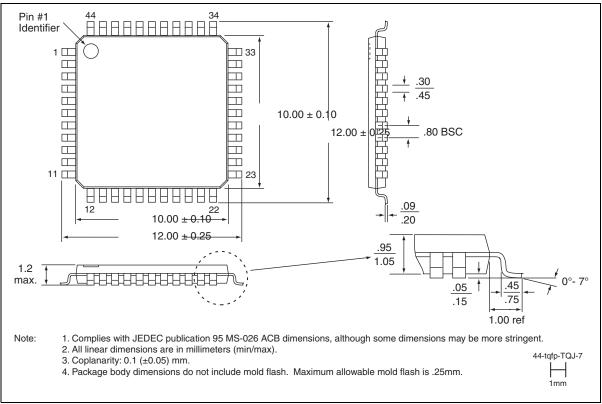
44-lead Thin Quad Flat Pack (TQFP) SST Package Code: TQJ
